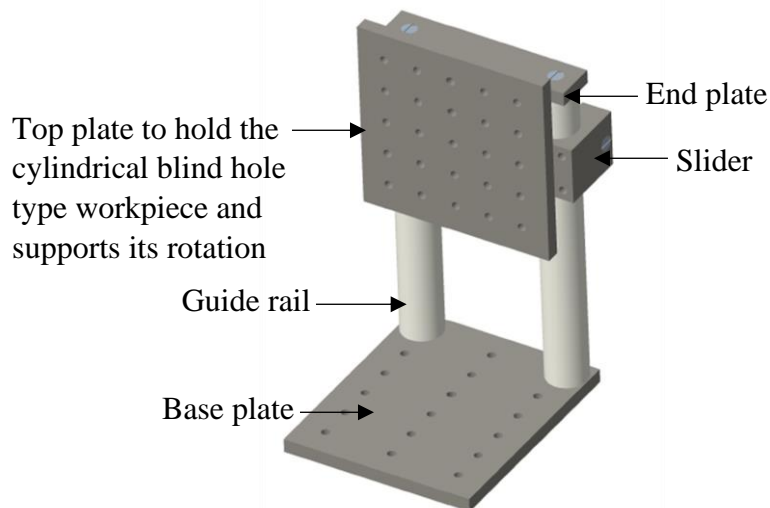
Three-dimensional CAD model of the height adjustment system for maintaining uniform working gap during finishing of longitudinal surface of the cylindrical blind hole type workpiece.
